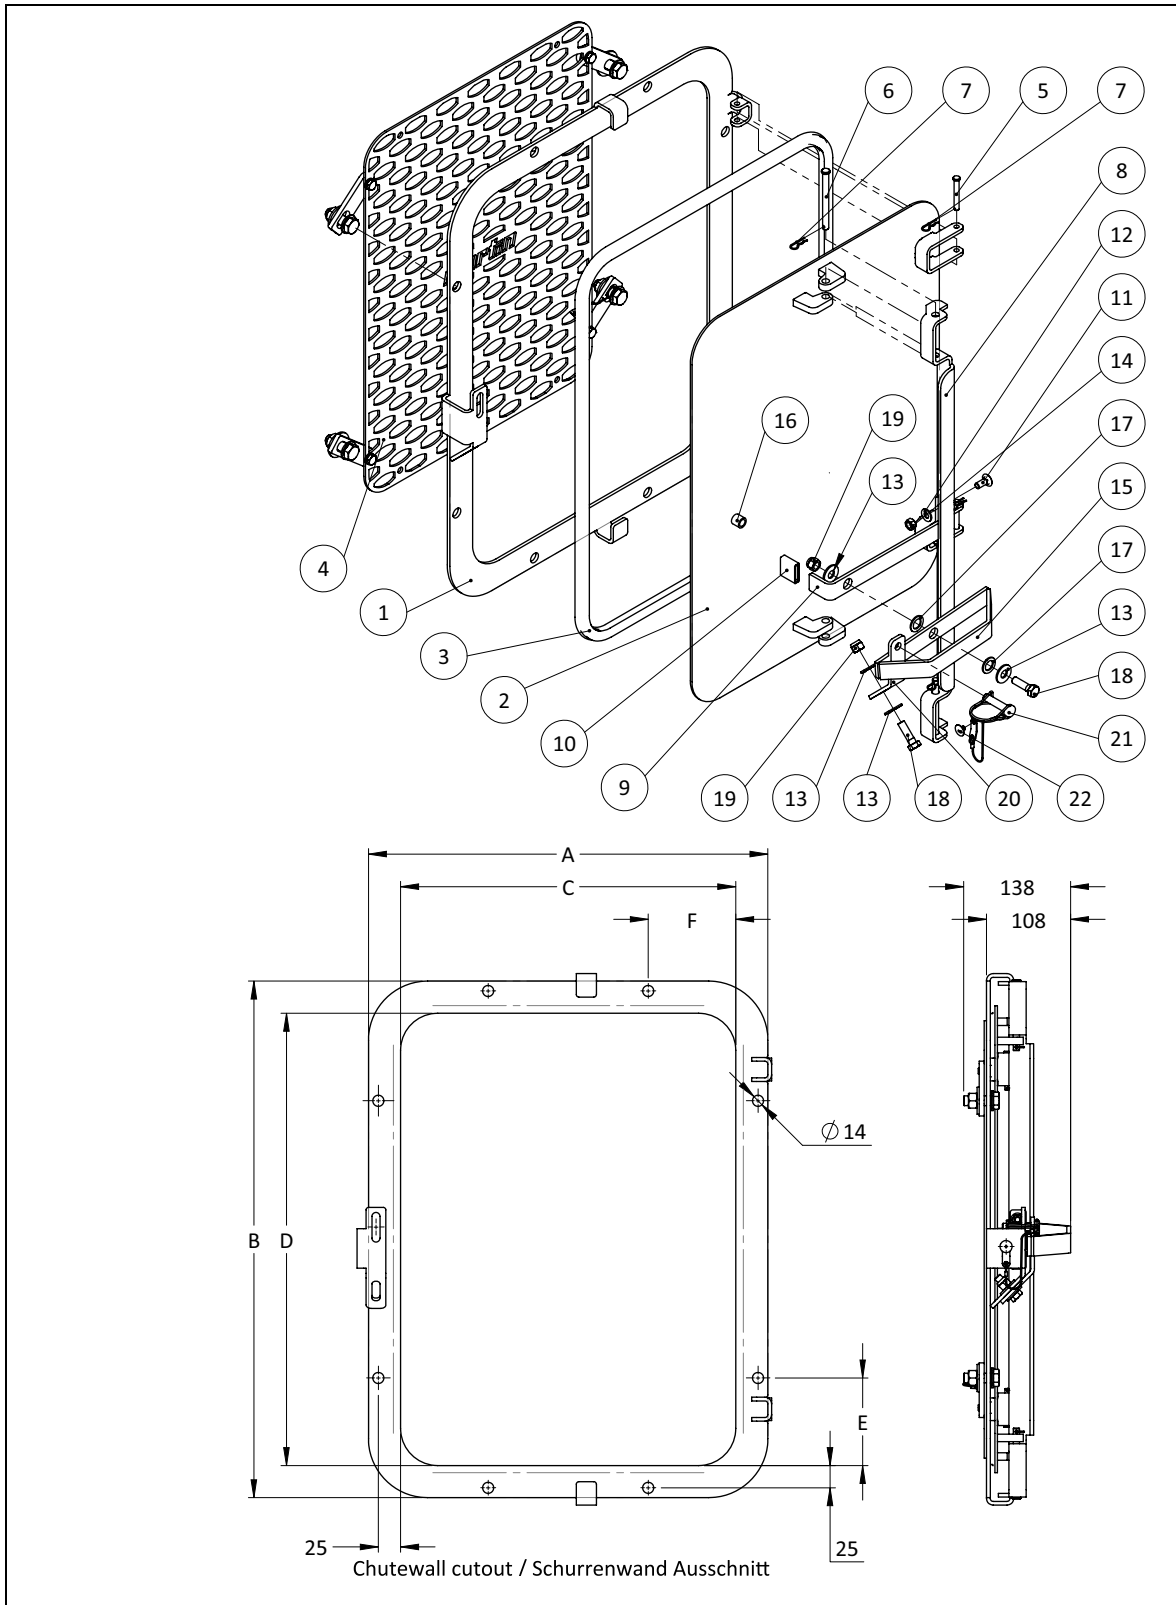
Martin® Inspection door with steel door (bolt with handle)
